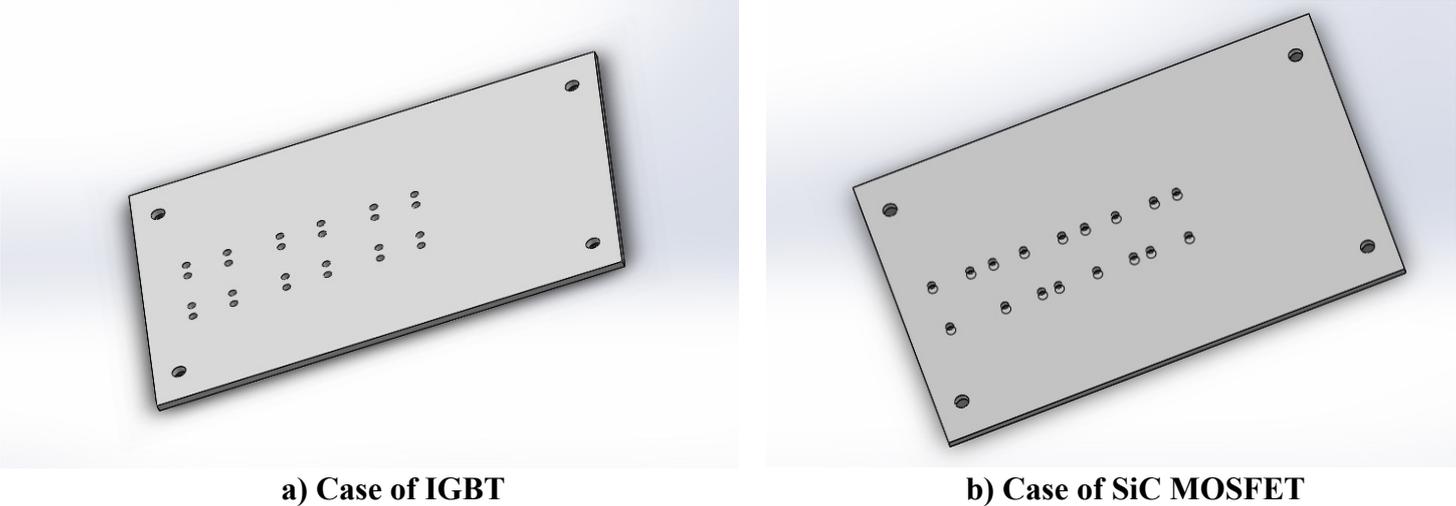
3D geometry of the cold plates with the drilled holes for inserting the thermocouples
